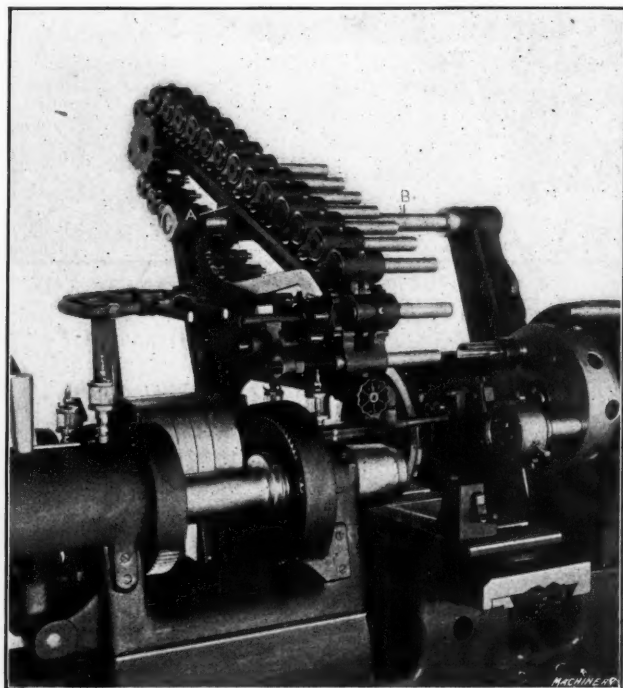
Rotary Tilting Magazine Attachment in Position to have Work removed by the Conveyor held in the Turret
